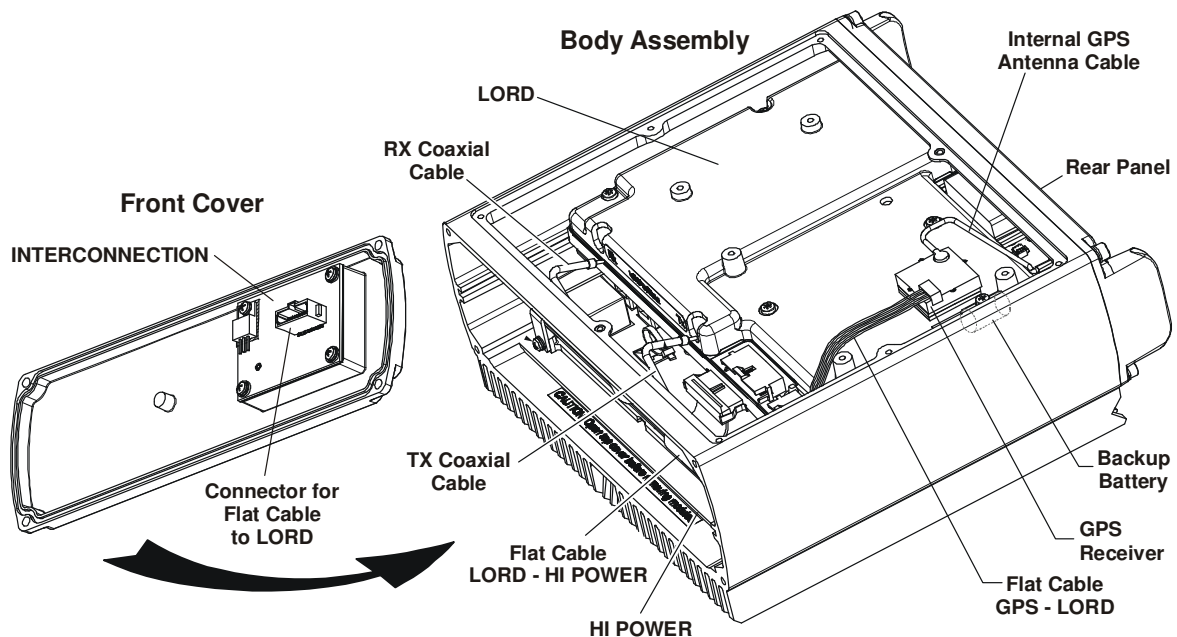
Micom-Z Trunk-Mount Version, Structure of Body Assembly
